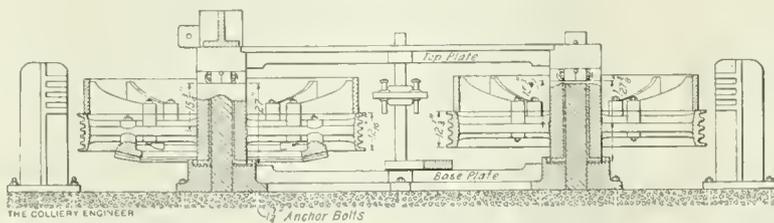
LONGITUDINAL SECTION OF ROPE SHEAVE
